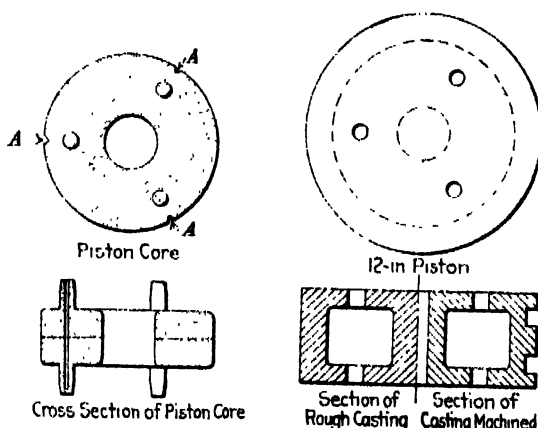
Notch Method of Making Two Halves of Core Register in Mold
